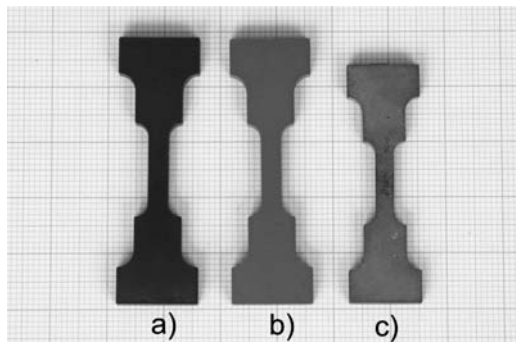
Powder B tensile test samples (a) as MIMed, (b) partly debinded, (c) sintered 1250°C , 10 h in vacuum.
